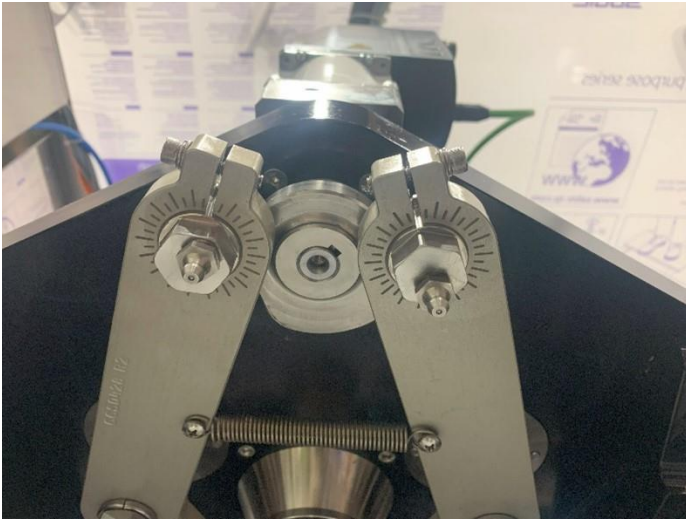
Rotate Hex Nut at Bottom of Seaming Arm
